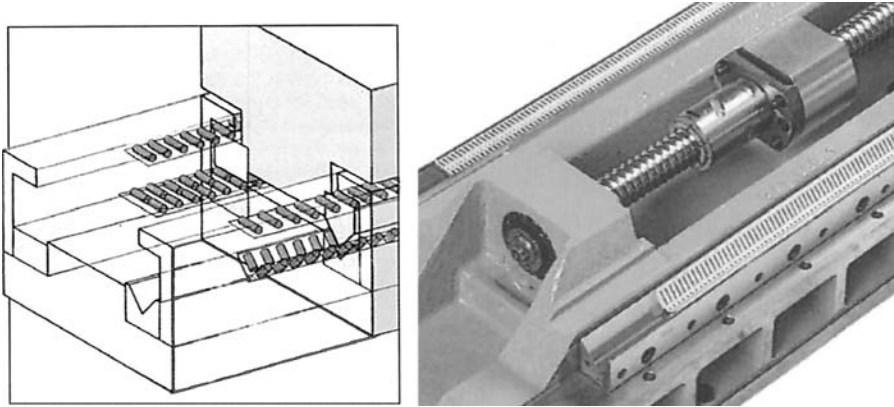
Koyo machine KVD series vertical spindle surface grinder.
